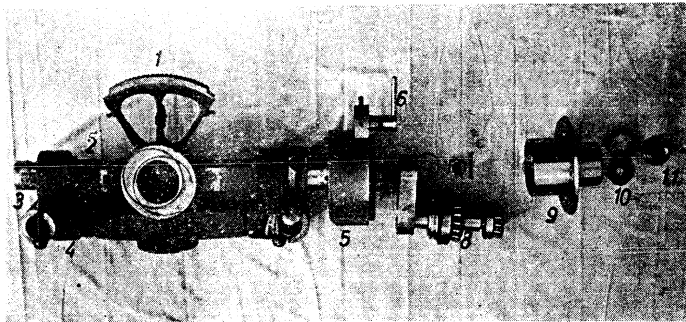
AXLE WITH EQUALIZER AND SPRING
